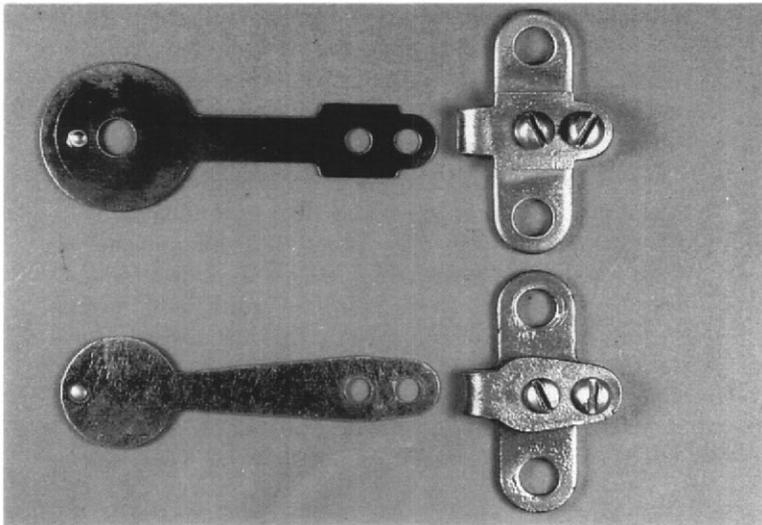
View of the two vibrator spring mounting bases. The upper one was used prior to June 6, 1917, and the lower one with the arrowhead-shaped base was used after that date.
